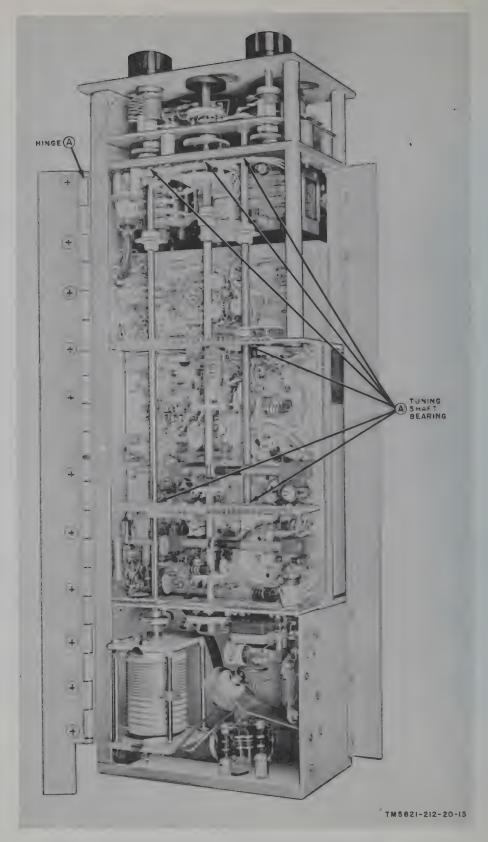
RF amplifier driver chassis shaft bearings and hinges, lubrication points.
